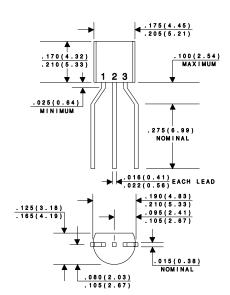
PHYSICAL DIMENSIONS All Dimensions in Inches (mm)
